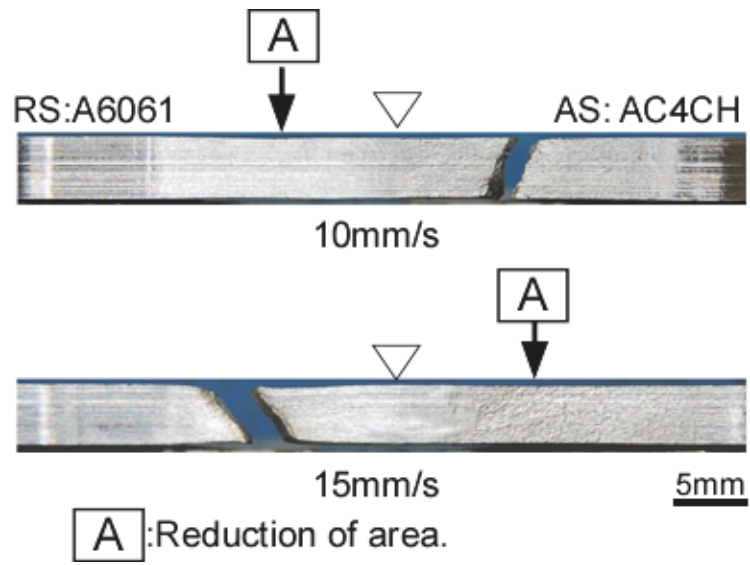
Macrostructure of a fractured tensile testpiece. The triangles indicate the positions of the welding interfaces.
